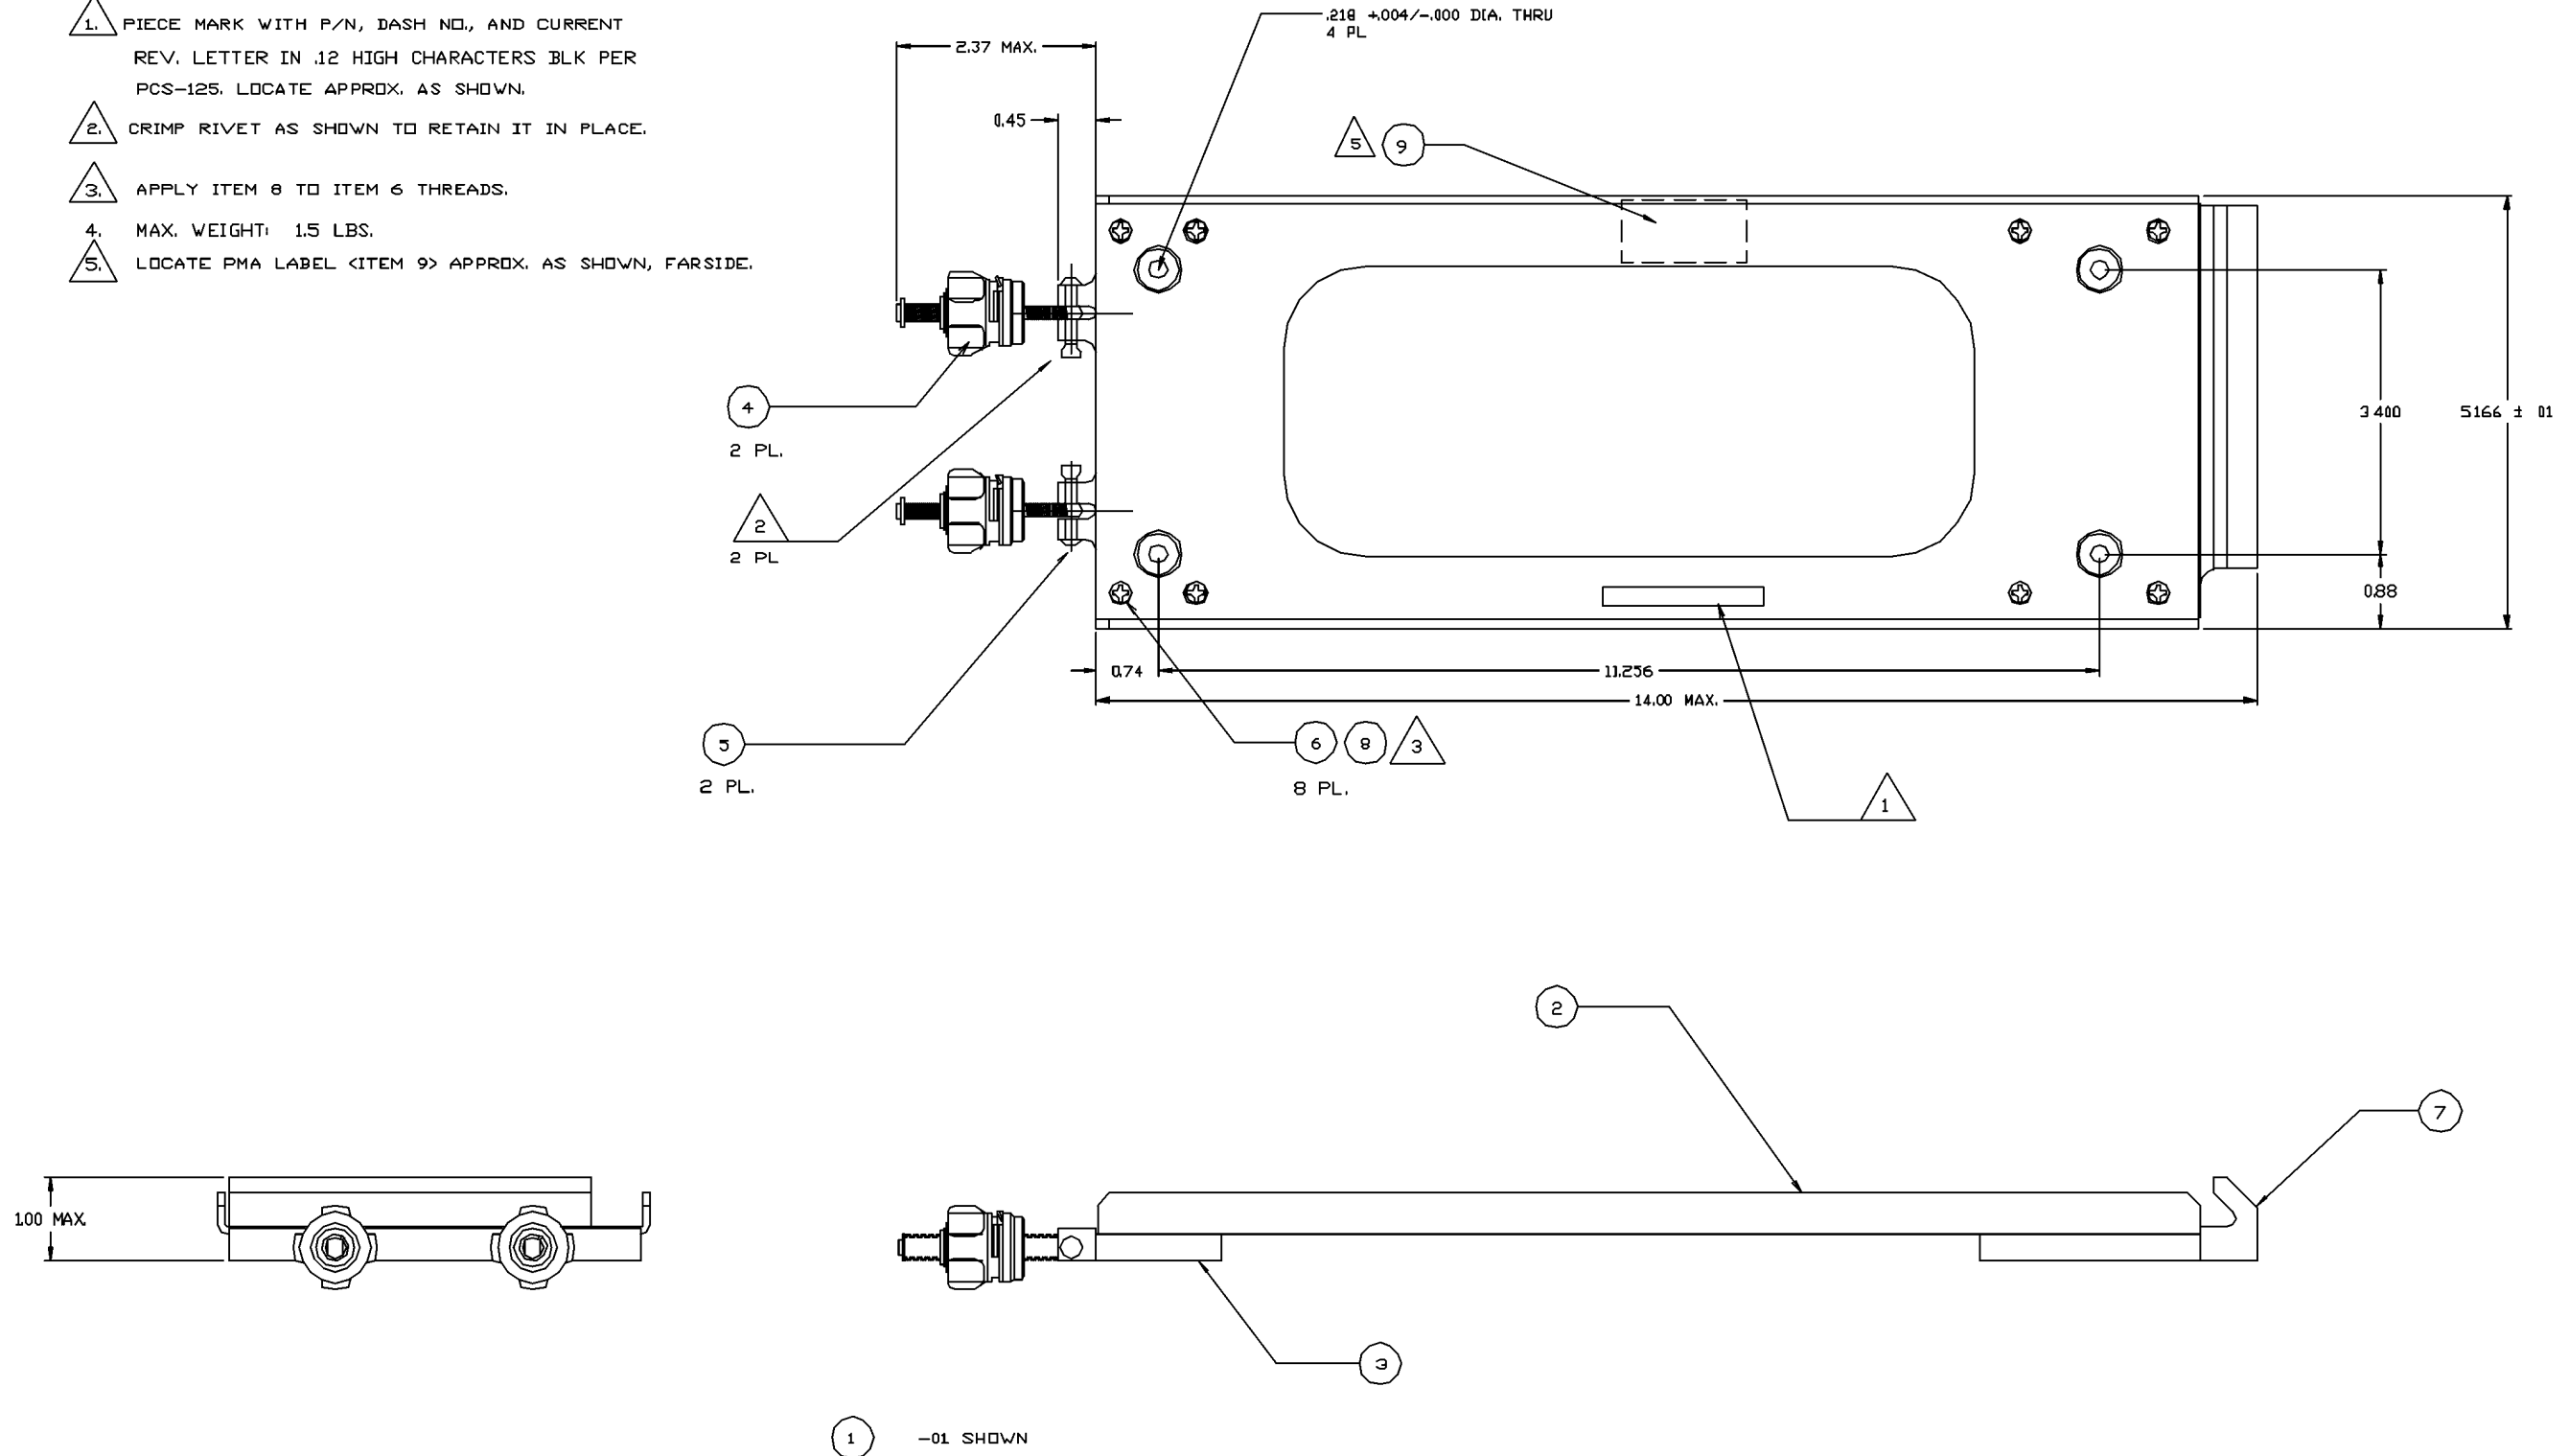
RT-5000 Tray Horizontal Mount (Sheet 1 of 1)
